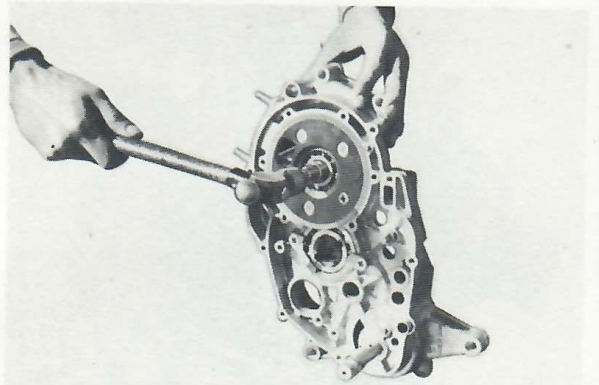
Removing crankshaft from crankcase with a hammer
